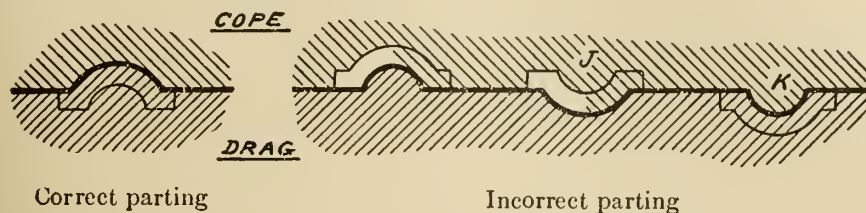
Casting Partially in Drag and Partially in Cope.
